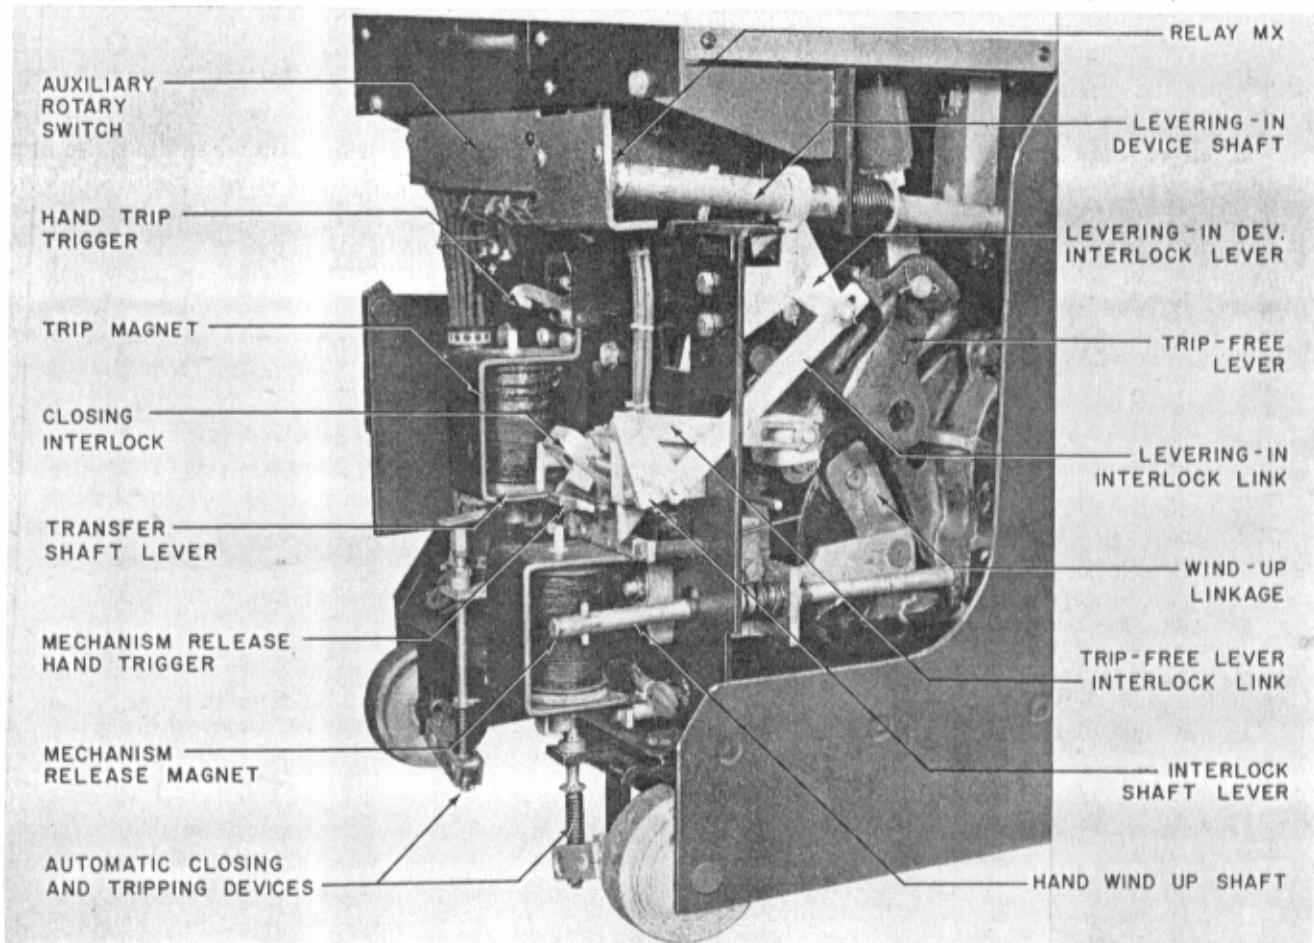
Type 50-DH-150 A.C.B. With Stored Energy (Spring) Closing Mechanism, Side View Showing Mechanism Details
